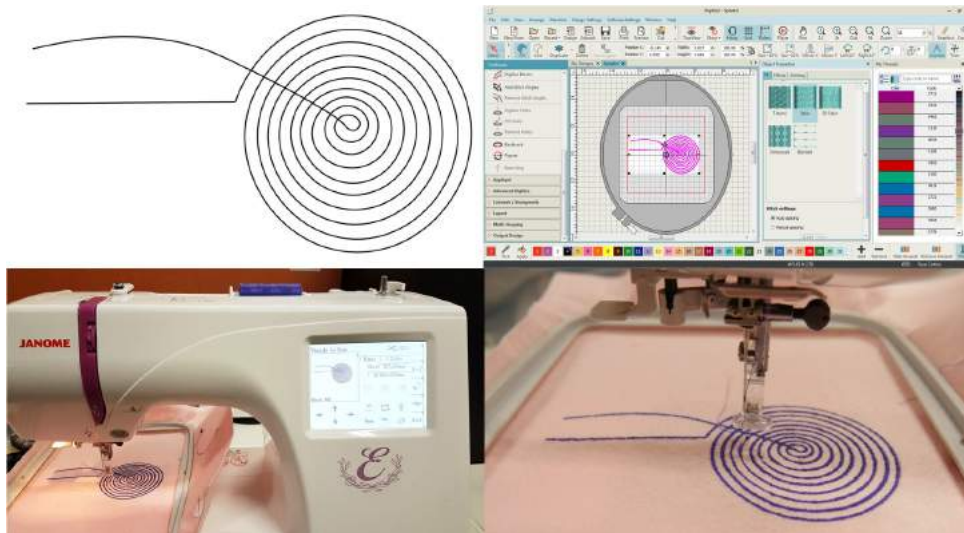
Machine-stitched soft speaker using a digital sewing machine.
